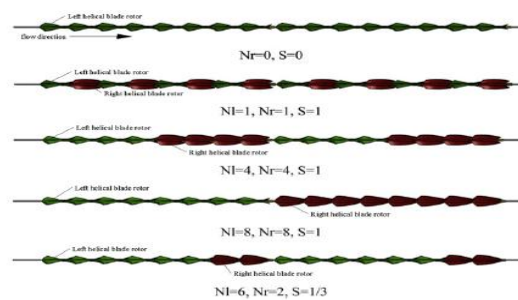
Geometric Configuration and Assembled Mode of the Left Right Helical Blade Rotors
